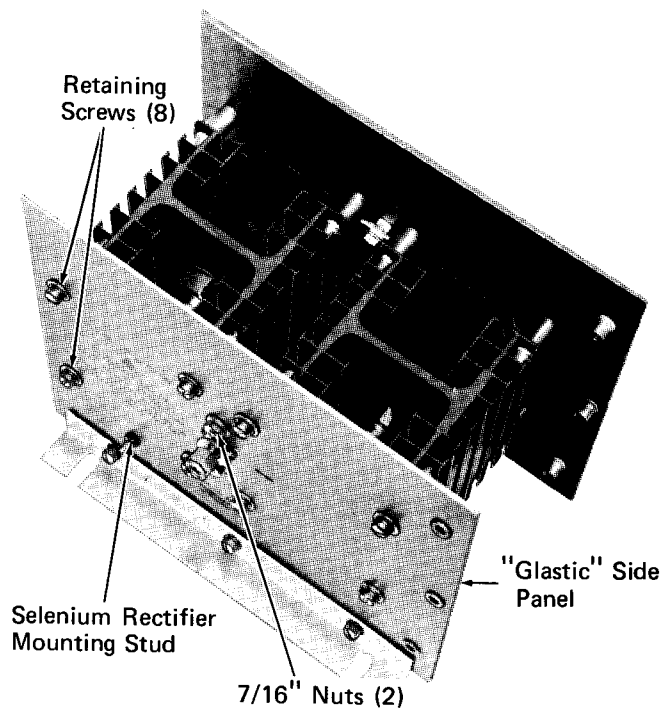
Battery Charging Rectifier Assembly 8319071
